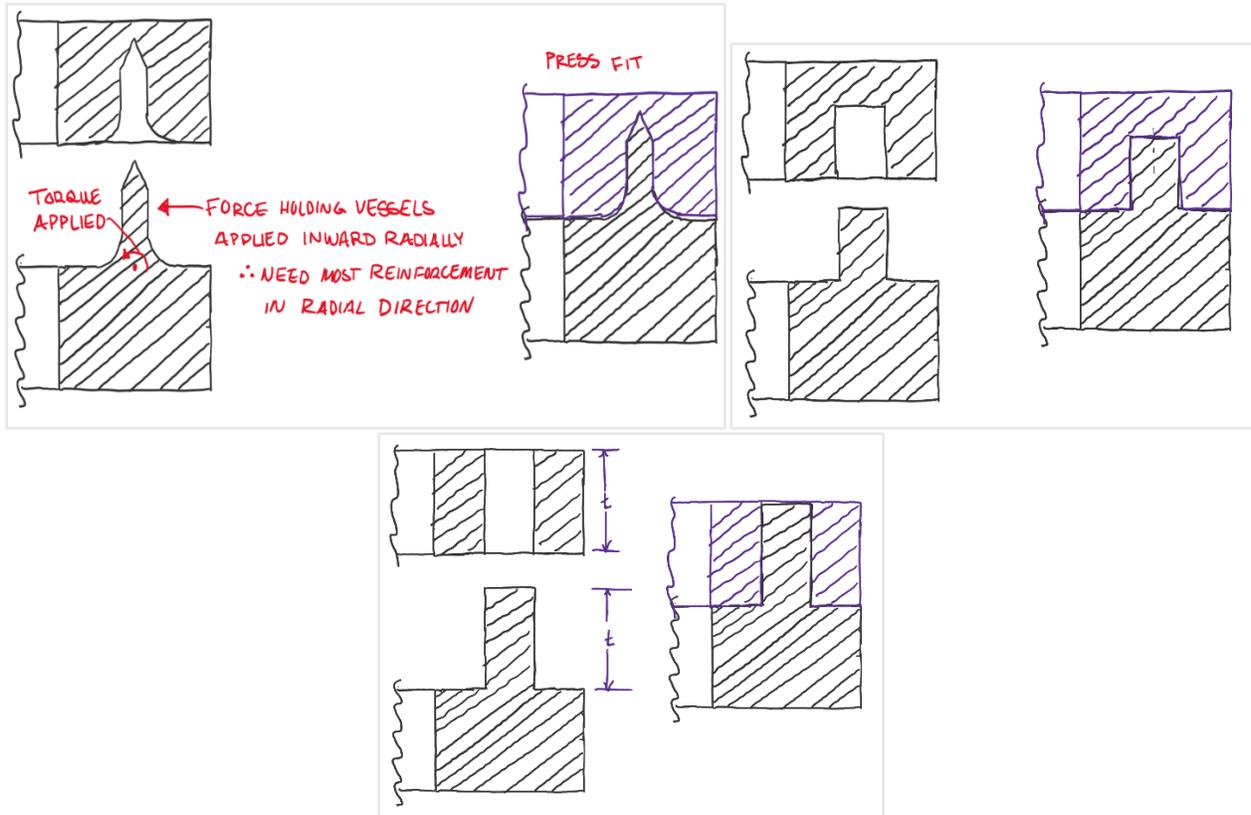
Pin Geometries. A) Filleted with spike B) Wide Pin
